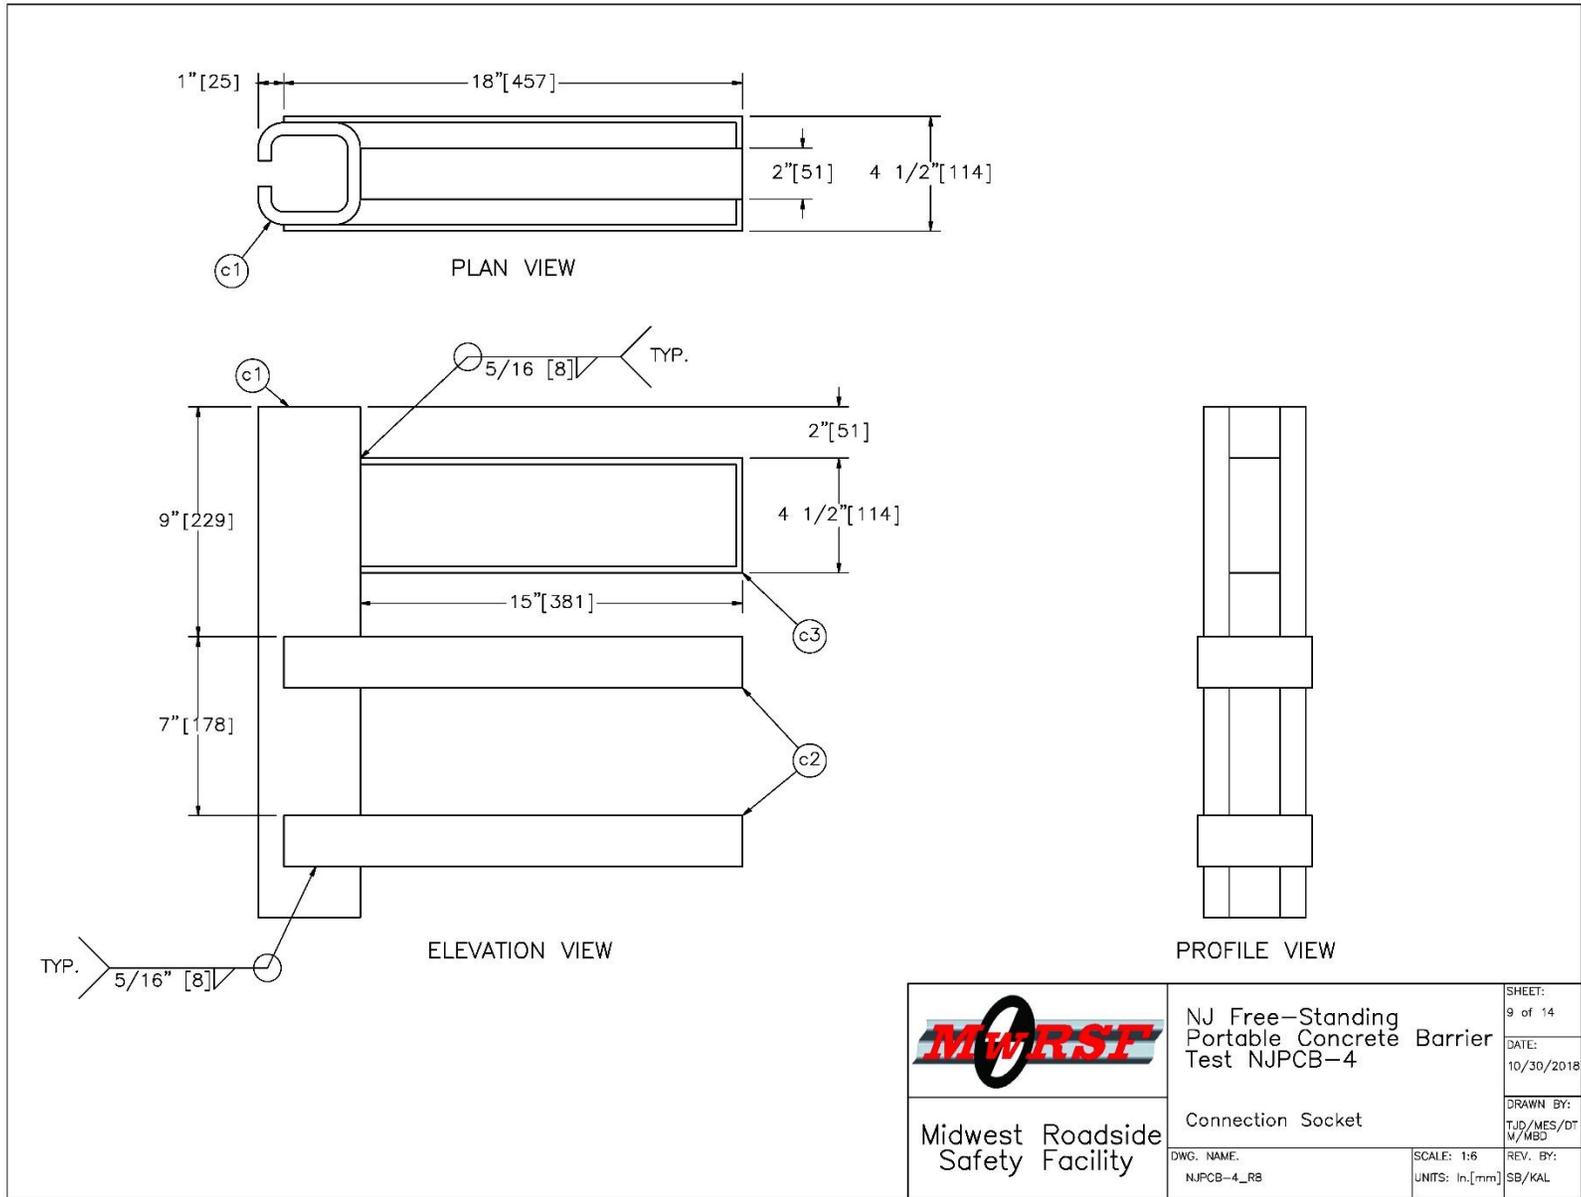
PCB Connection Socket Details, Test No. NJPCB-4
